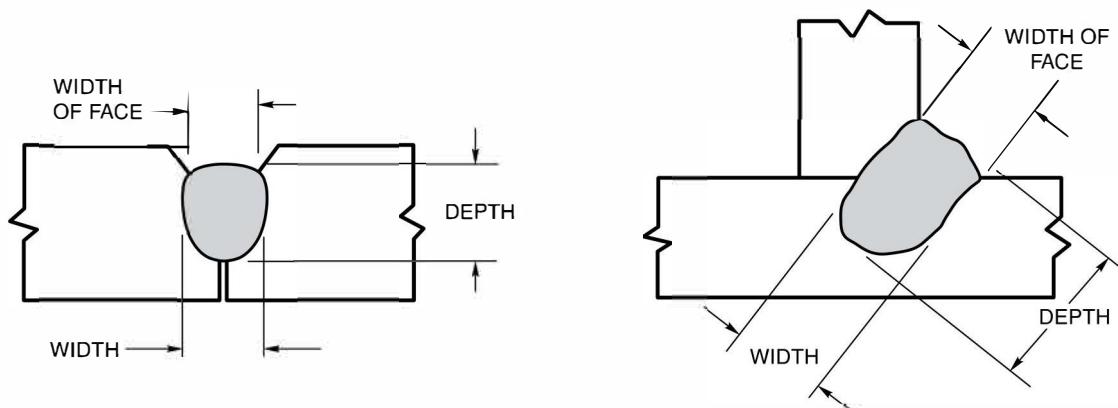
Weld Bead in which Depth and Width Exceed the Width of the Weld Face (see 5.8.2.1)
